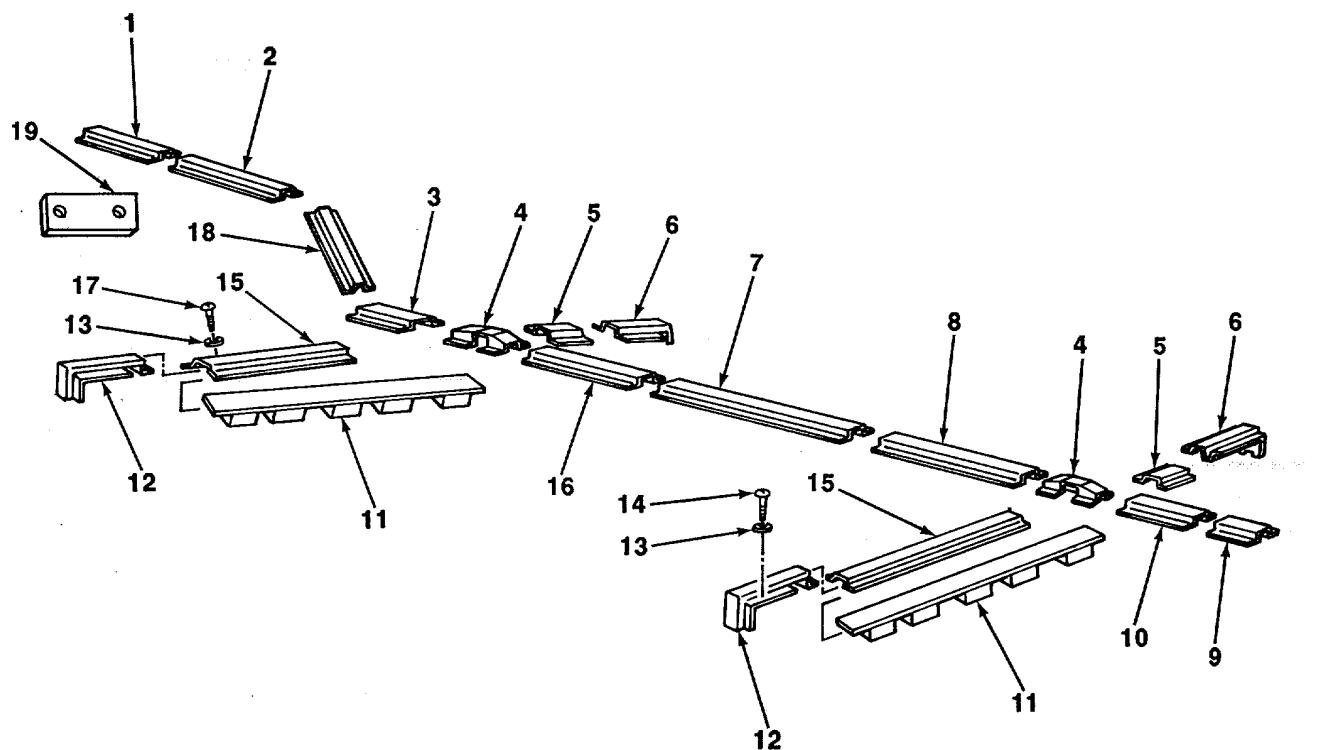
LEVELING DEVICE LIGHT ASSEMBLY.
